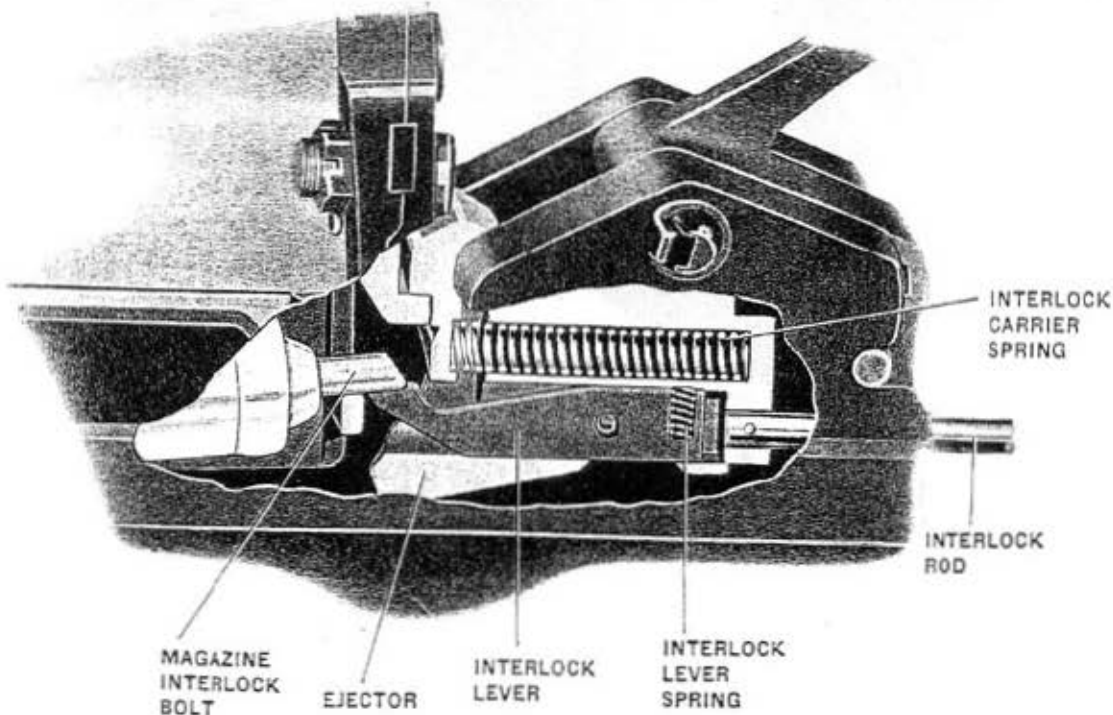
Magazine is empty—last round has been fired—interlock gear tripped by feeder bolt thus tripping trigger gear and keeping the gun cocked
